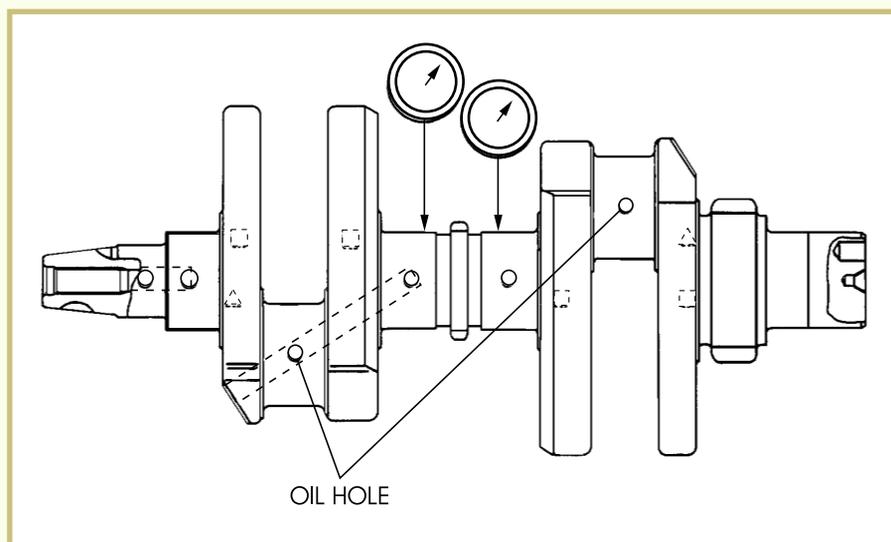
Check for crankshaft run-out. Note the oil holes that feed the connecting rods. (Courtesy Kawasaki Motor Corp., U.S.A.)
